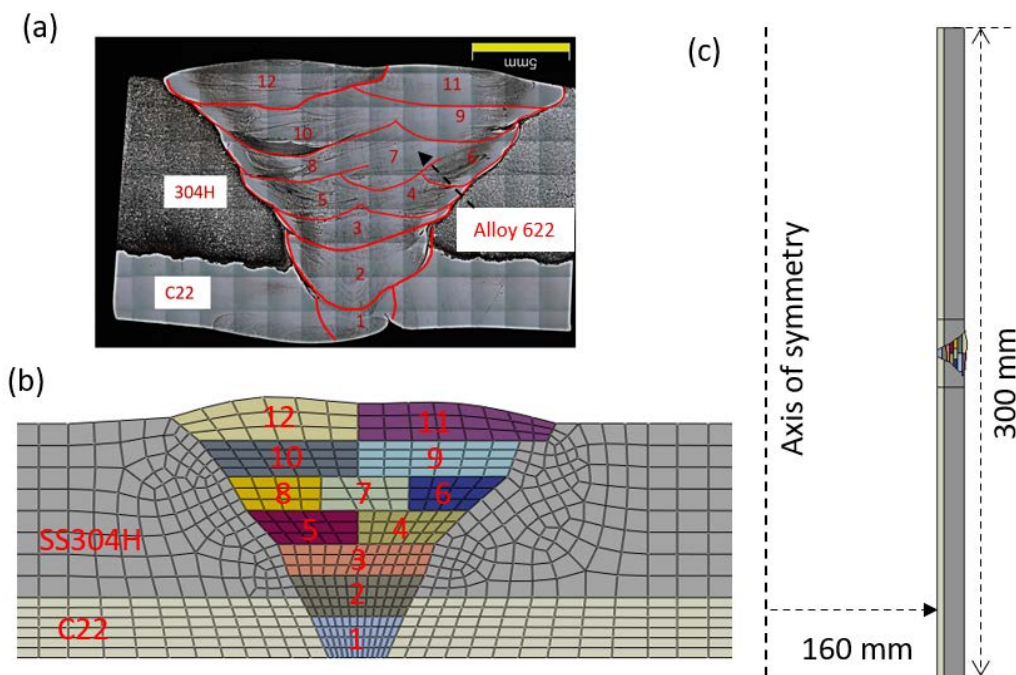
(a) Weld macrograph highlighting fusion line of each bead. (b) FE model geometry and a graded mesh. (c) Configuration of 2D axisymmetric FE model for SS304/C22 clad pipe welding
